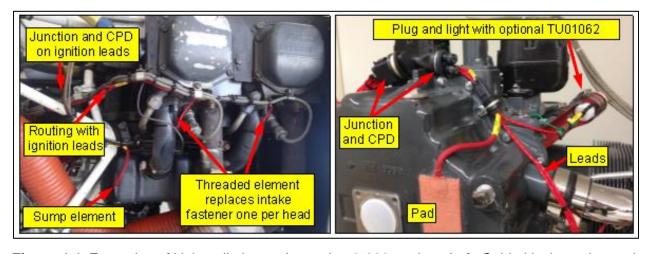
Examples of kit installation on Lycoming 0-320 engine. Left: Cable kit shown located on and routed with ignition leads secured with cable-ties and clamps. Right: Cable kit shown located on engine, junction and CPD secured with clamps and cable-ties.
